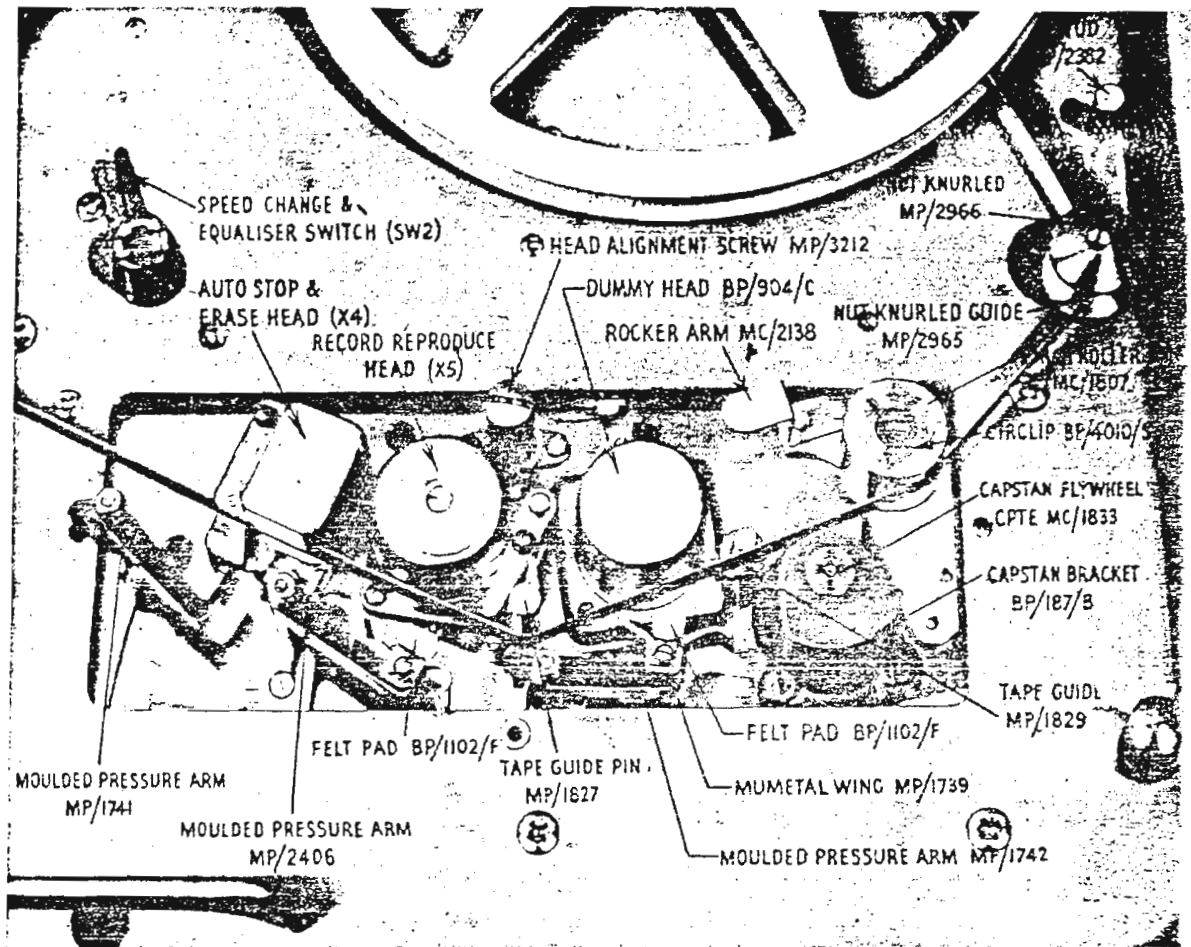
HEAD AND CAPSTAN ASSEMBLY
